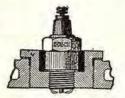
Valve cap too thick; out of the path of the gas and too long a path to cooling water.
